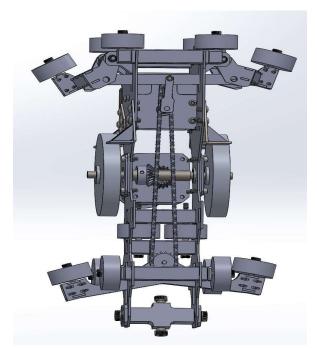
The whole assembly of the bogie which shows the bottom and upper steering arms.
